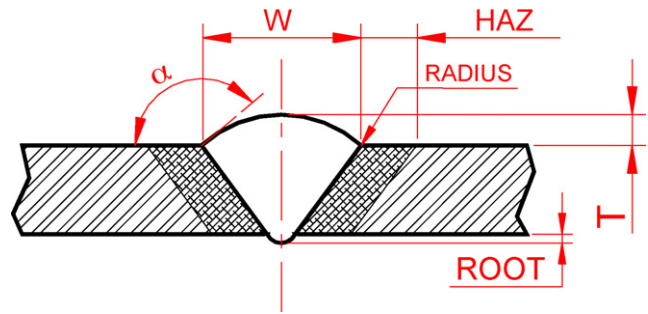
Main weld joint geometric factors (data presented in Table 4), where “W” is the weld width, “ α ” is the angle between the weld and the base metal, “HAZ” is the heat affected zone, “T” is the weld reinforcement and “R” is the weld root reinforcement.
